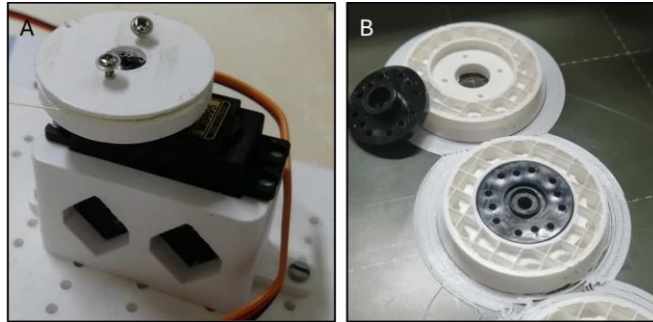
Single MG995 module (A) full assembly (B) pulleys.
